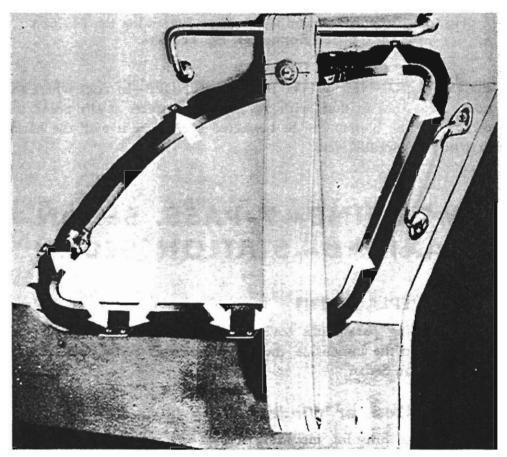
Take Out the Weatherstrip Retainer Screws Indicated by Arrows, and Push the Glass Inward.
